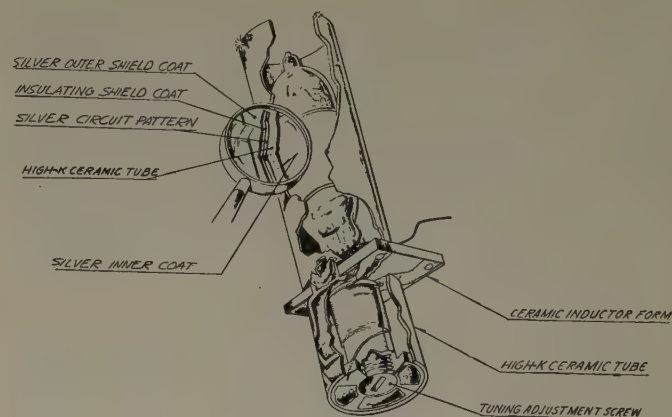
Cutaway view of a typical stage of the Model PC-IV, printed-circuit amplifier.
